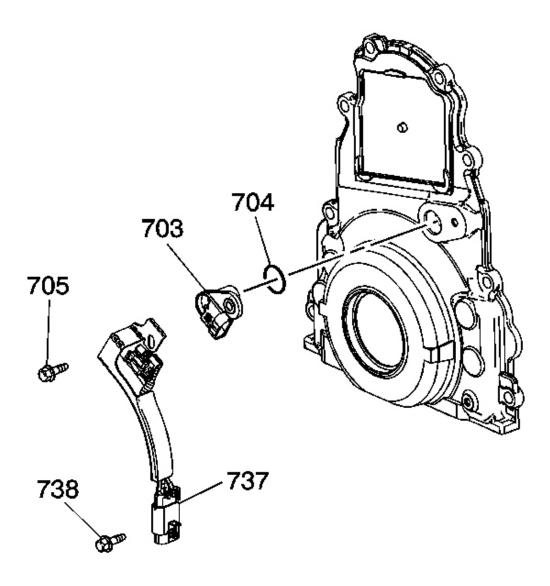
O-Ring Seal, Sensor, Wire Harness & Bolts
